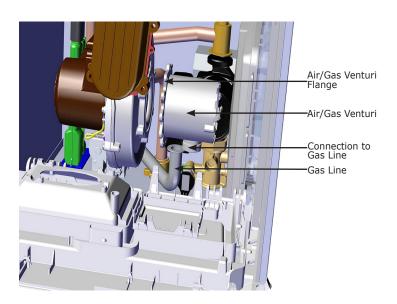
Air/Gas Venturi - Removed (Front of Boiler front panel removed)
